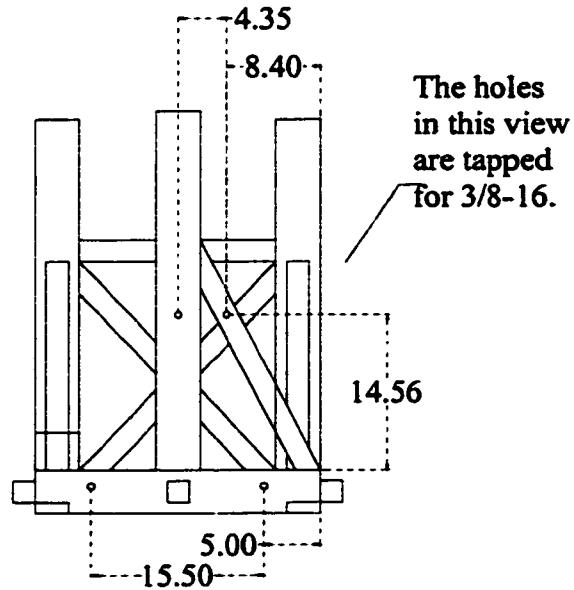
Design drawings for the STM Vacuum Chamber Stand depicting positions of tapped and through holes.
